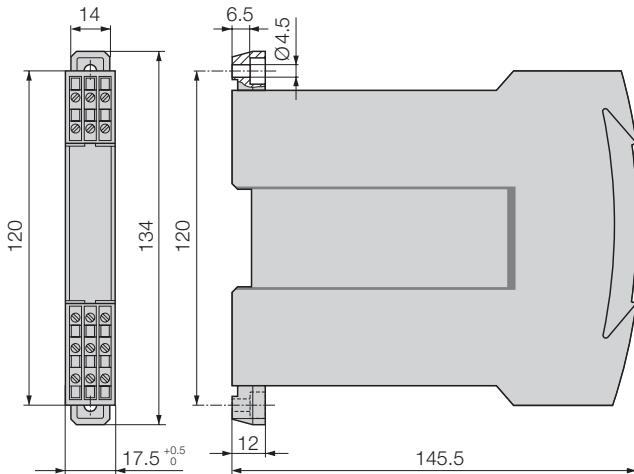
SINEAX TV 808 in housing S17 screw hole mounting brackets pulled out.
